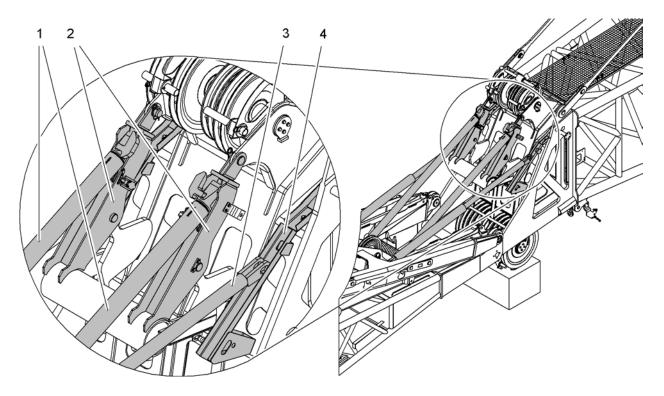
Rigid and hydraulic tilting-back supports should be located in the guide rails on the boom head section
